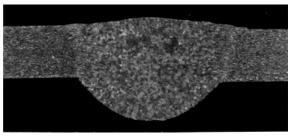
clearly shows that even in pulse welding the typical behaviour of shielding gas employed is observed here also. The higher energy input of helium produces broader and flatter welds.
